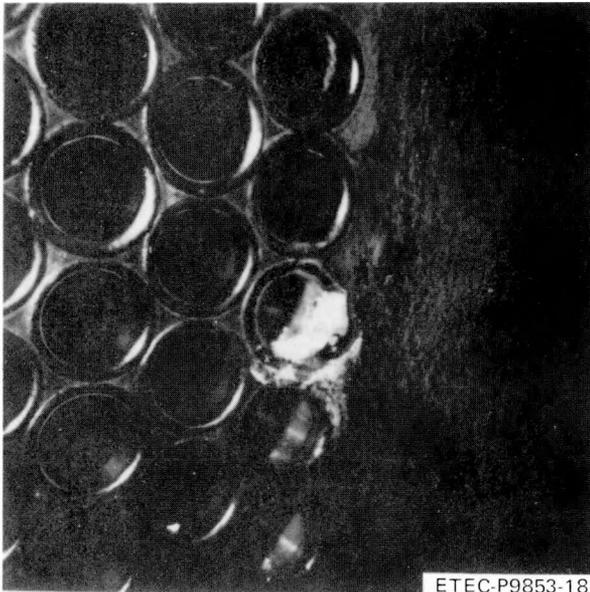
Closeup of Leaky Plug Weld on Tube 13
